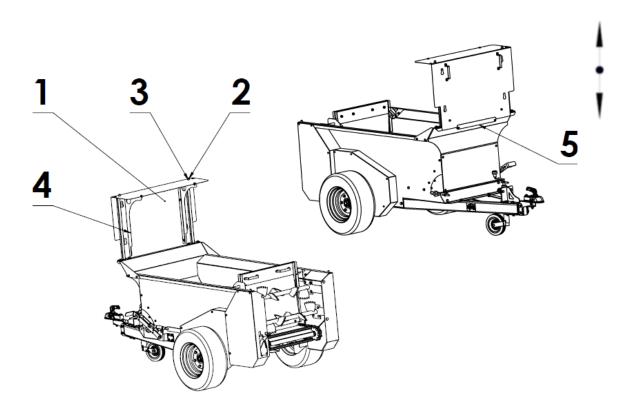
View of rear guard in fastened position on brackets 1 – rear guard; 2 – safety pin; 3 – locking pin II; 4 – guard bracket; 5 – front limiting sheet.
